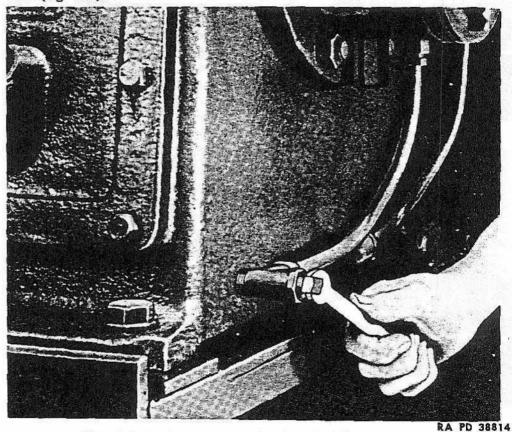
Removing Crankcase Drain Plug—Air Compressor
